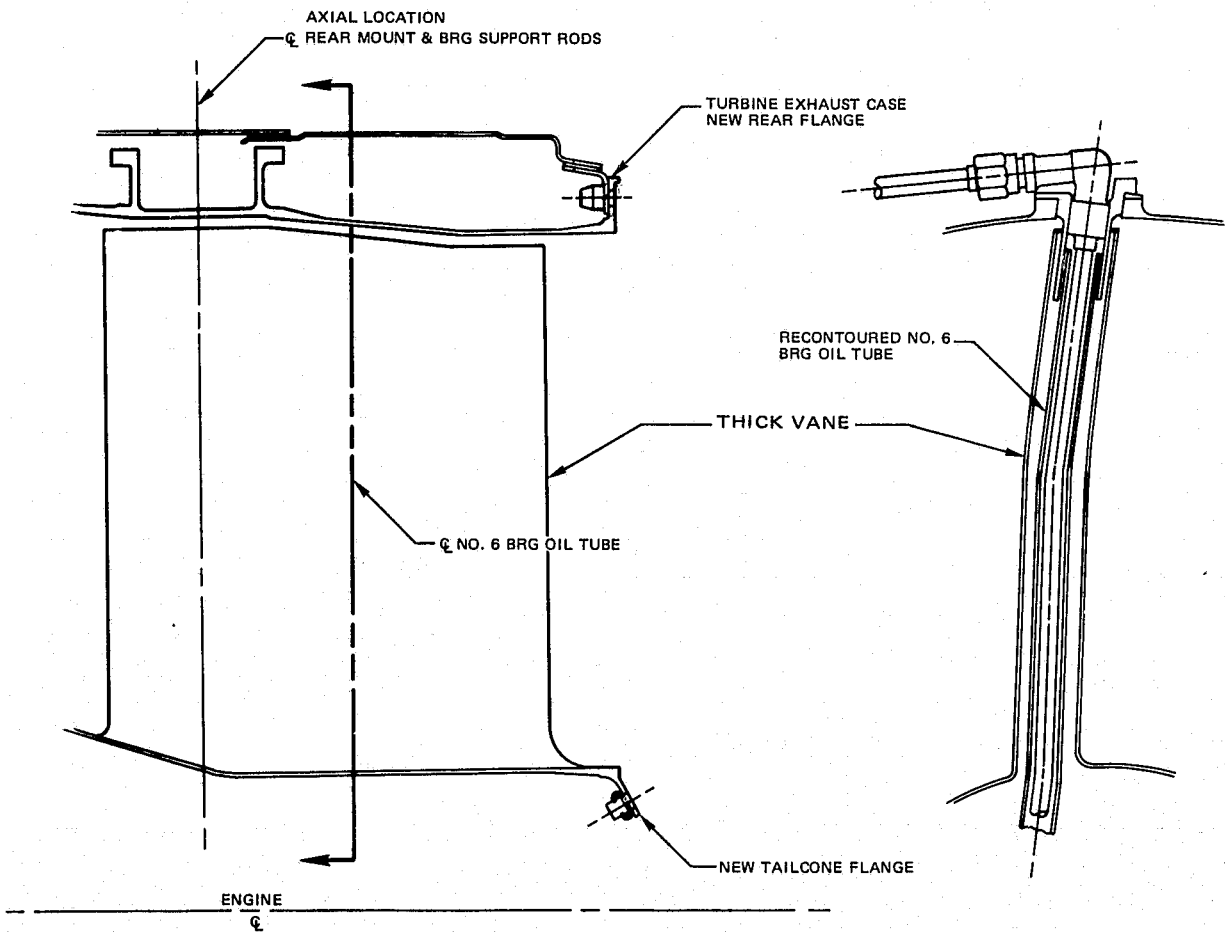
JT8D-100 Turbine Exhaust Case & Exit Guide Vane Assembly
